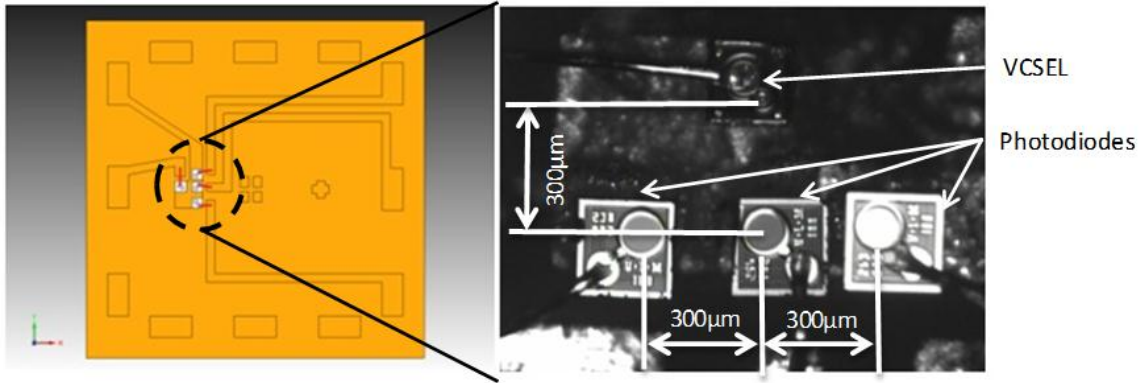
Packaged optical components: wire bonding schematic with connections in red (Left), a CCD image of a completed setup (Right)
